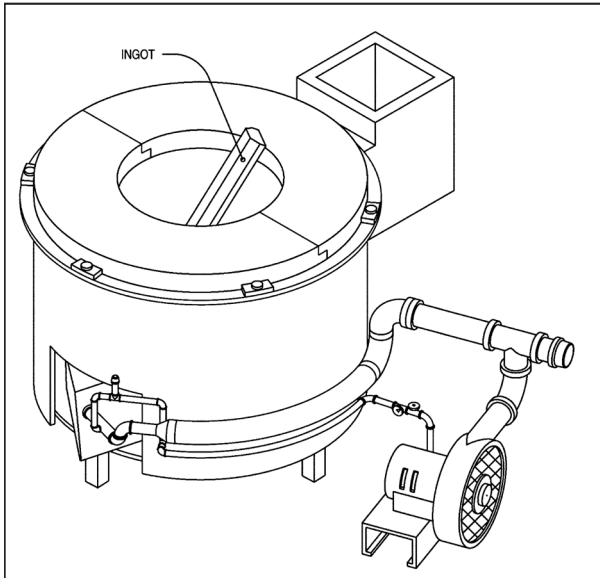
Illustration with ingot stuck in the charge well of the holding furnace
